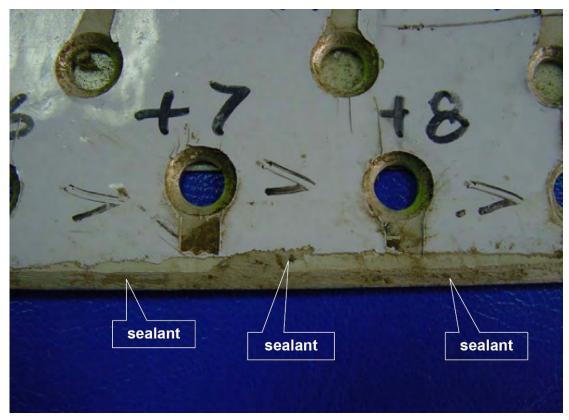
Paint removed from the doubler edge with sealant remaining
